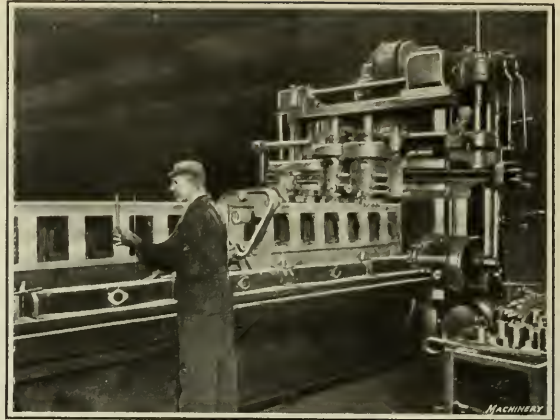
Ingersoll Milling Machine working on Crank-case of Six-cylinder, 120-horsepower Engine and Radiator Headers simultaneously
